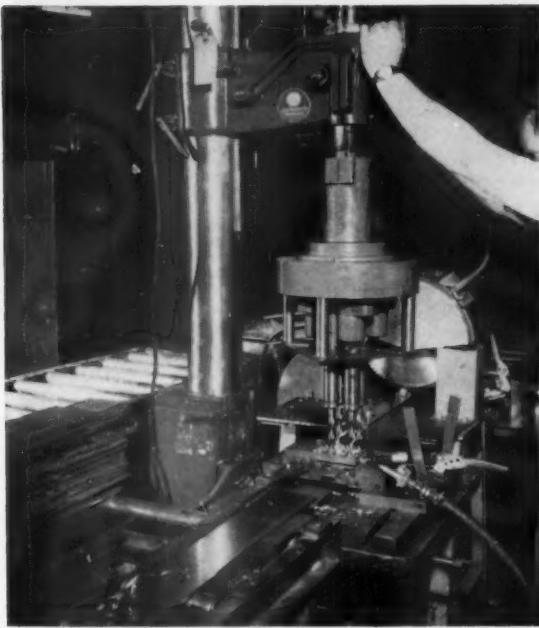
MULTIPLE-HEAD DRILL press is first in-line fabrication station. Here, four 9/16-in. holes are drilled in bus end in one operation. Lever clamp holds bus in jig. Air hose and nozzle in foreground keep press bed free of copper chips.
